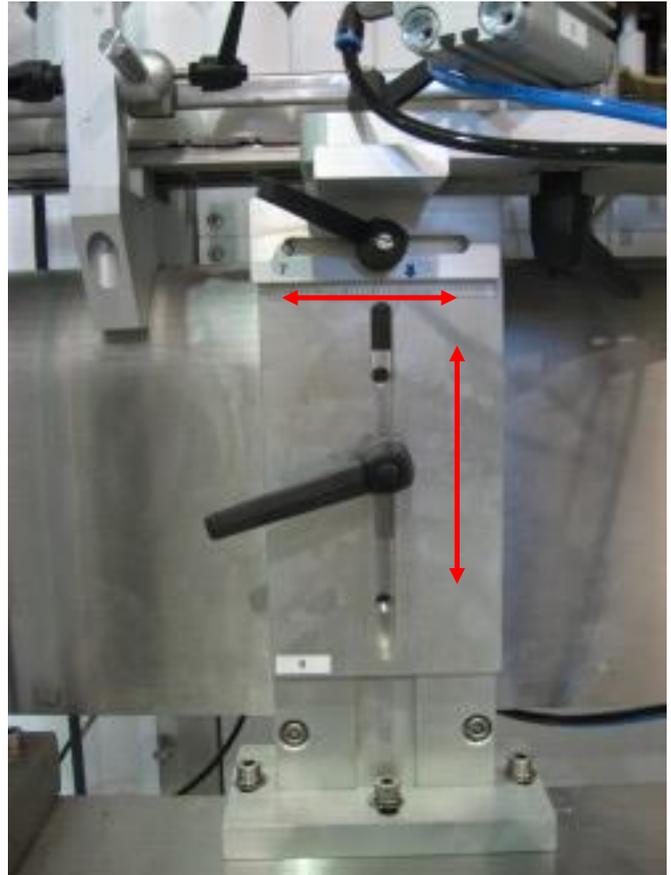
The starwheel can be adjusted Up and down or left and right.
